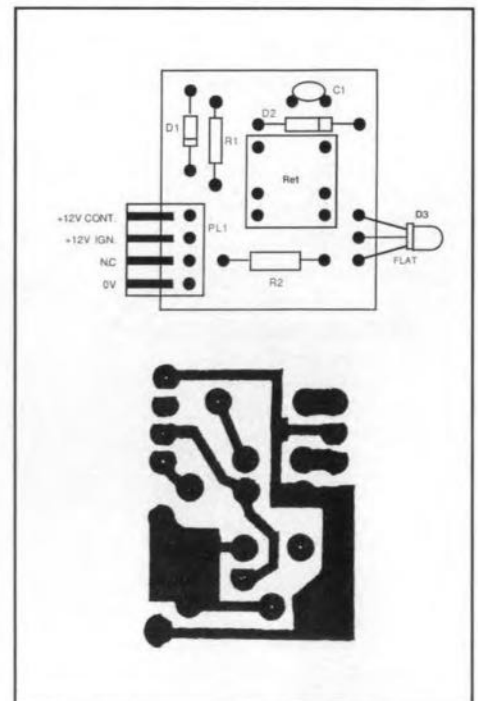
Printed-circuit board of the deterrent. The component side is shown true to scale.
